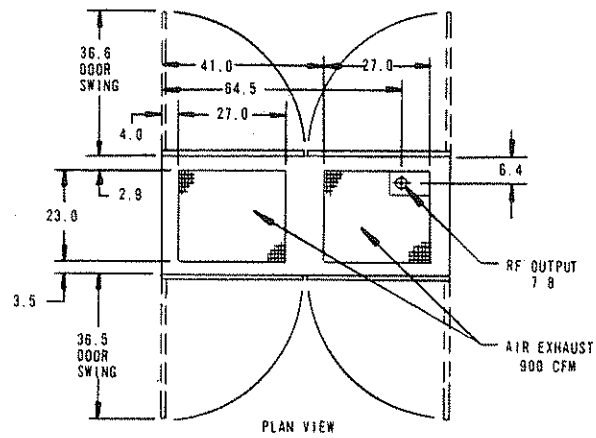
TRANSMITTER OUTLINE DRAWING
